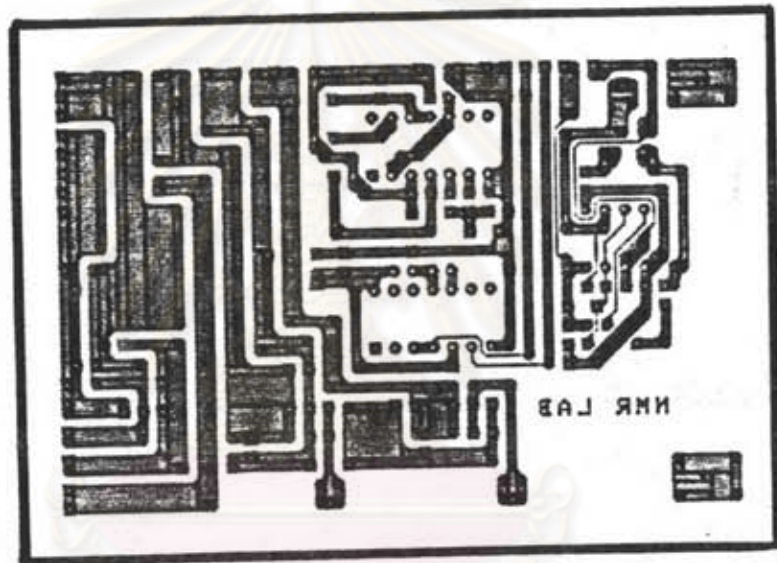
The mirror of the solder side of the printed circuit board for PSP.
